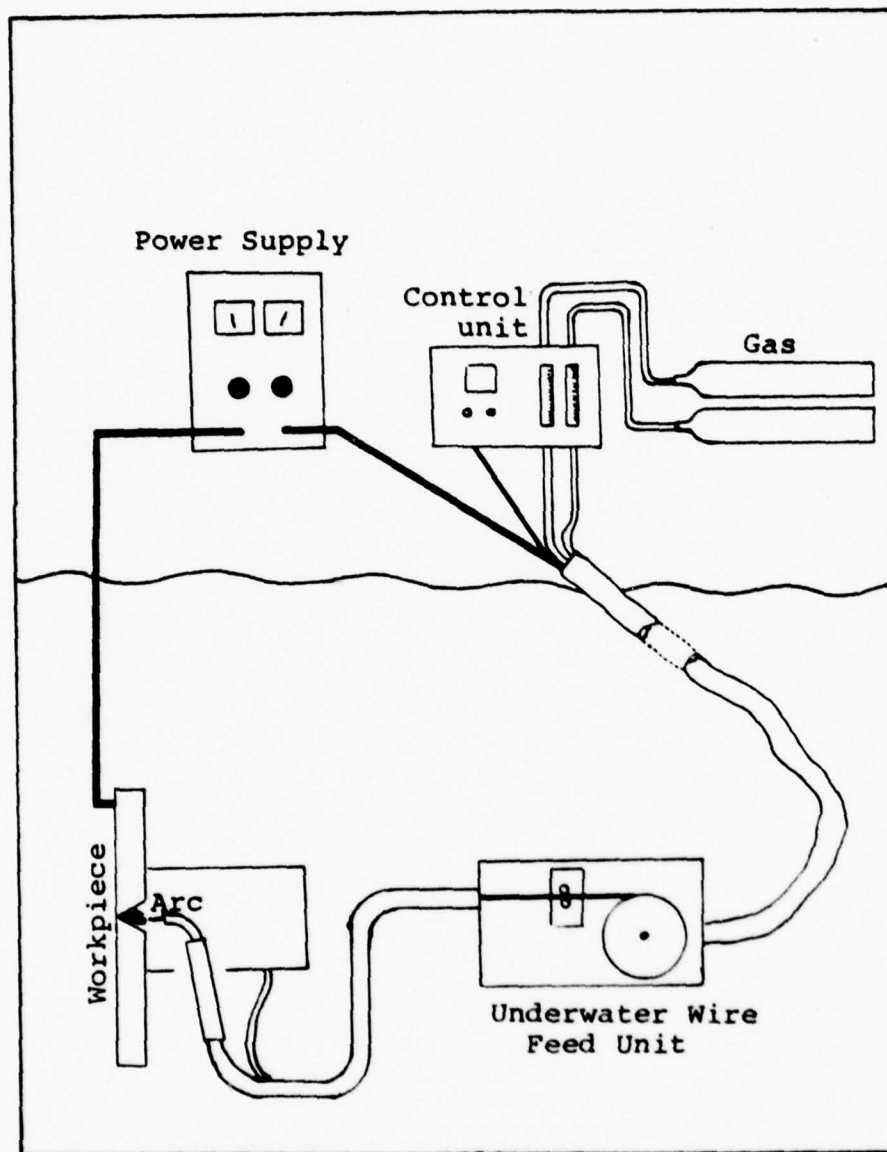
Schematic Diagram of Hydrobox Welding.
